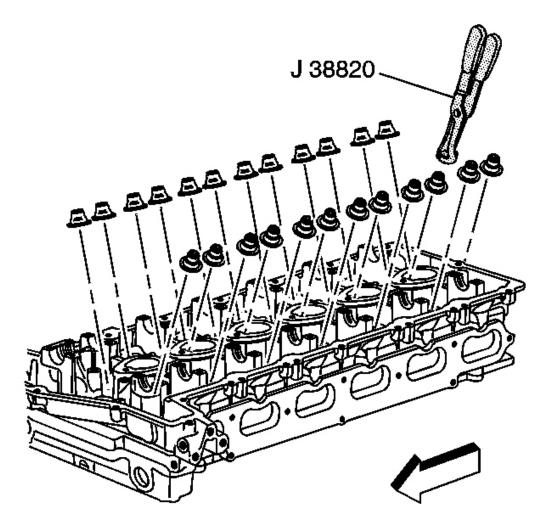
View Of J 38820 & Valve Seals Courtesy of GENERAL MOTORS CORP.
